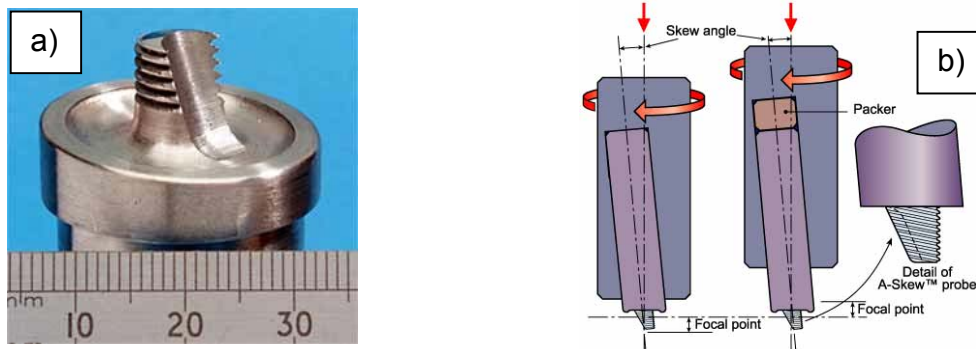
a) Tool prototype and b) schematic principle of Skew-stirTM-tool [20]
